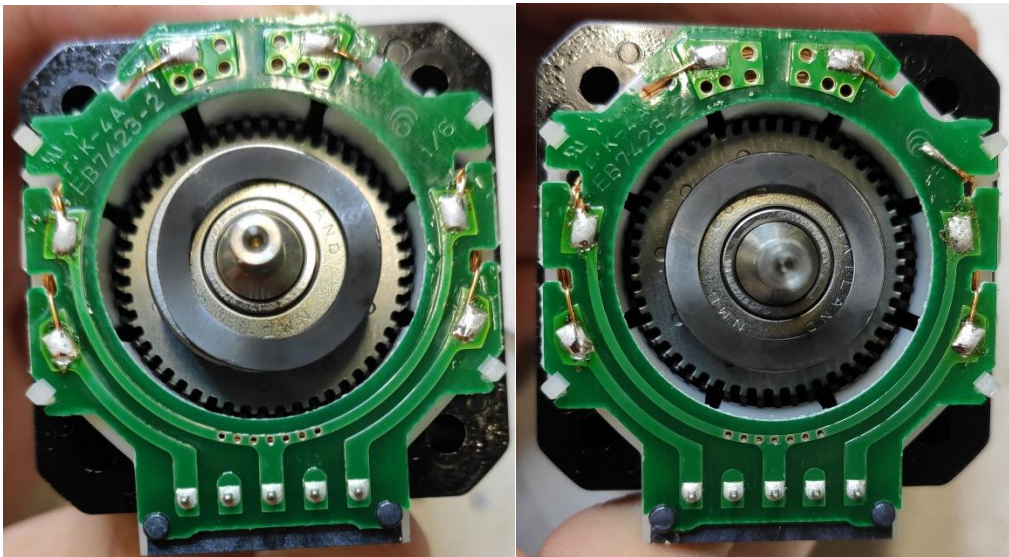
PKP245U12A2-R2FL bipolar stepper motor a) Unmodified PCB b) Modified to bipolar wiring by desoldering the centre pin
